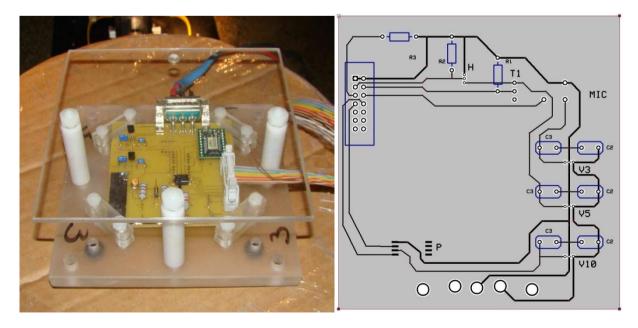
,42: the old sensor board design (left) and the new design (right) we used assembling new sensor boards
